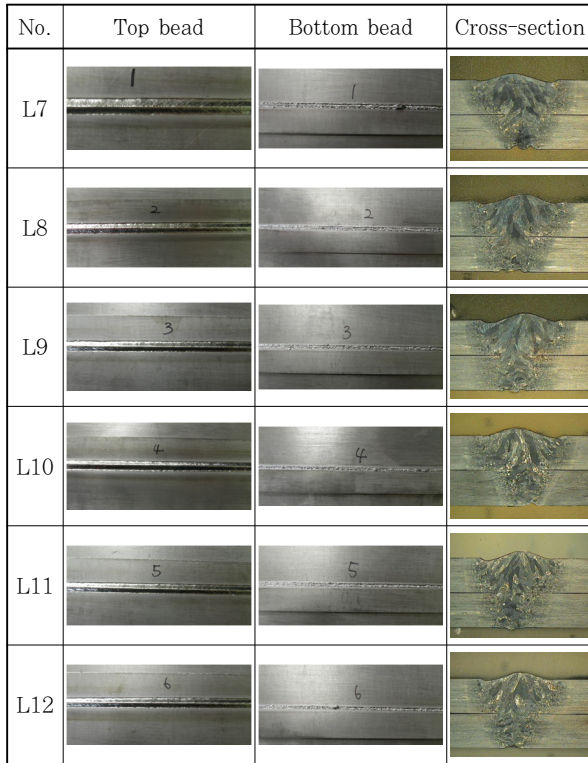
Bead shapes for electron beam overlap welding
